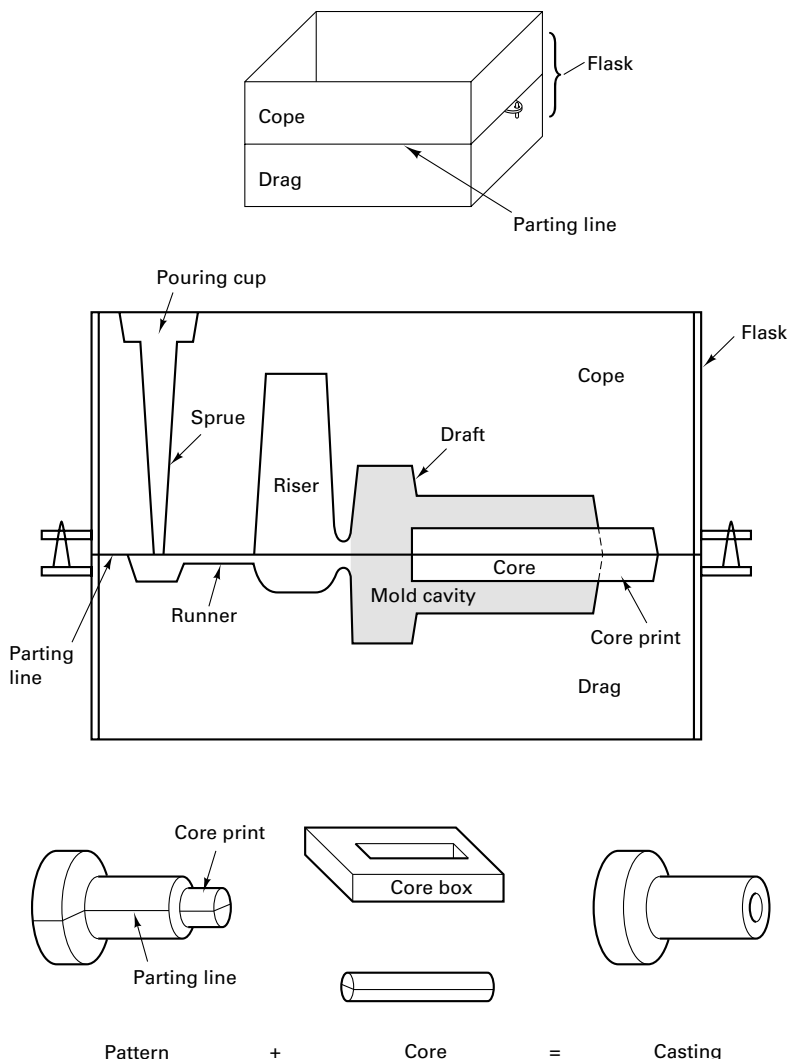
Cross section of a typical two-part sand mold indicating various mold components and terminology.
